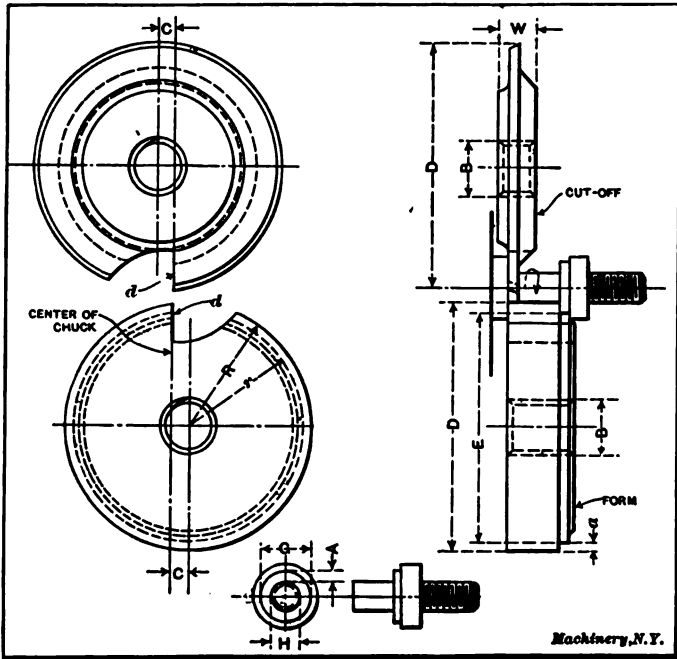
Diagram showing Principal Dimensions of Circular Form Tools
